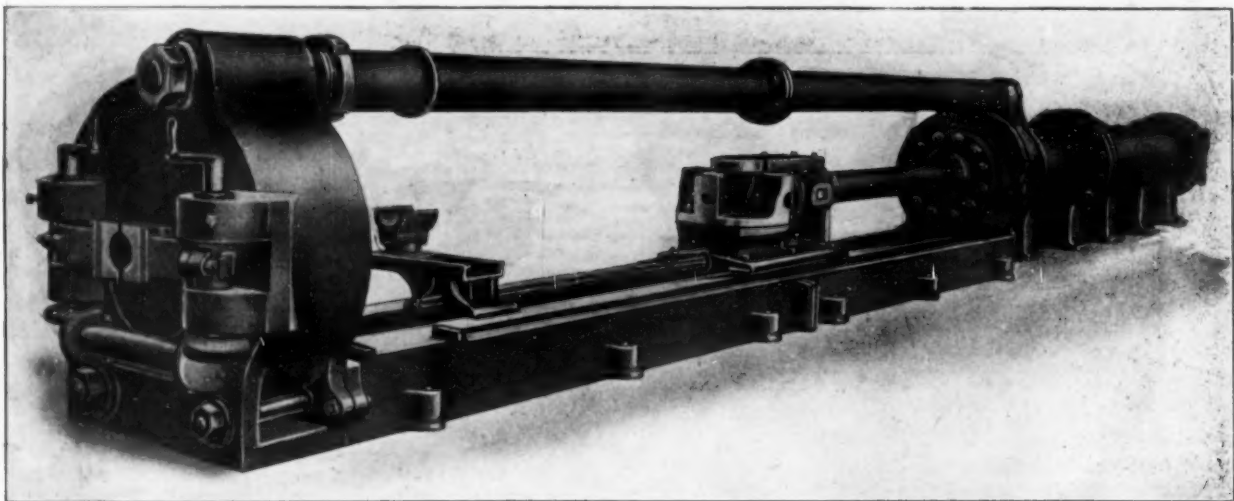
HYDRAULIC SEAMLESS TUBE MILL. MANUFACTURED BY WATERBURY-FARREL FOUNDRY AND MACHINE COMPANY, WATERBURY, CONN.
